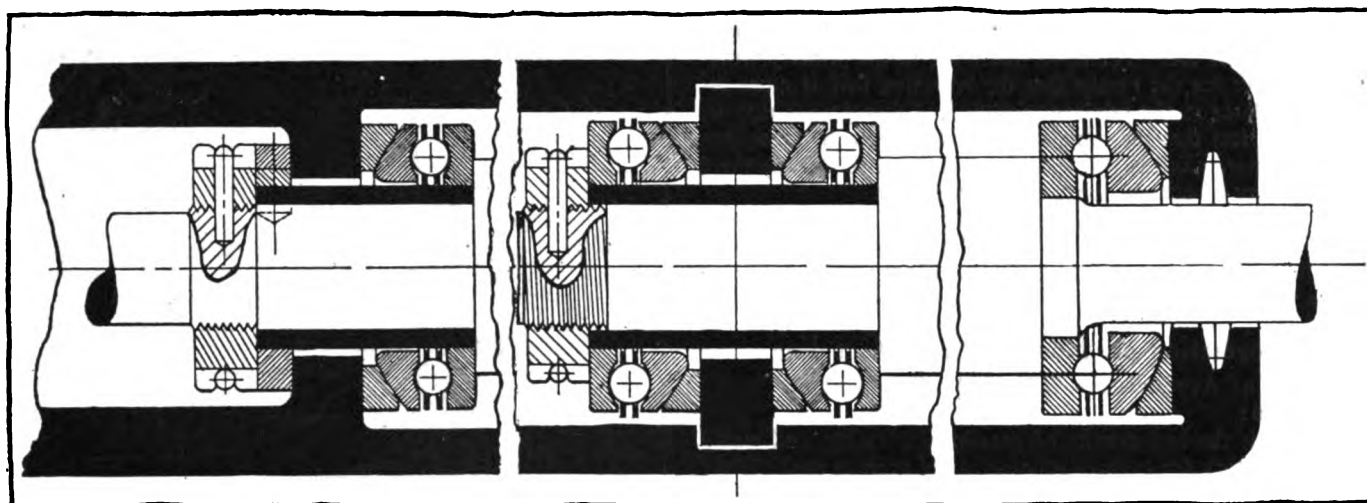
Three types of ball bearings designed to take thrust in either or both directions
